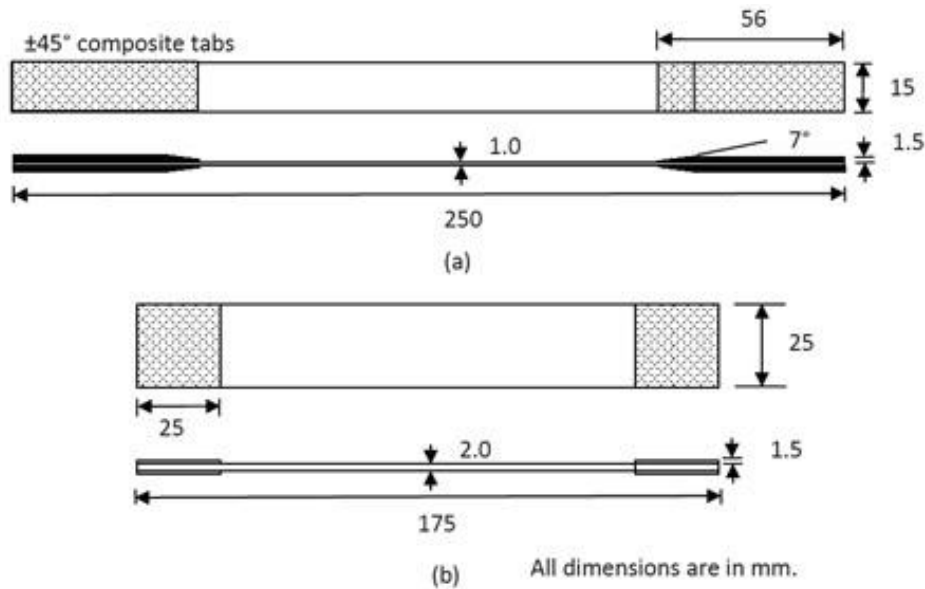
Polymer composite specimen for tensile test [14] www.astm.org
